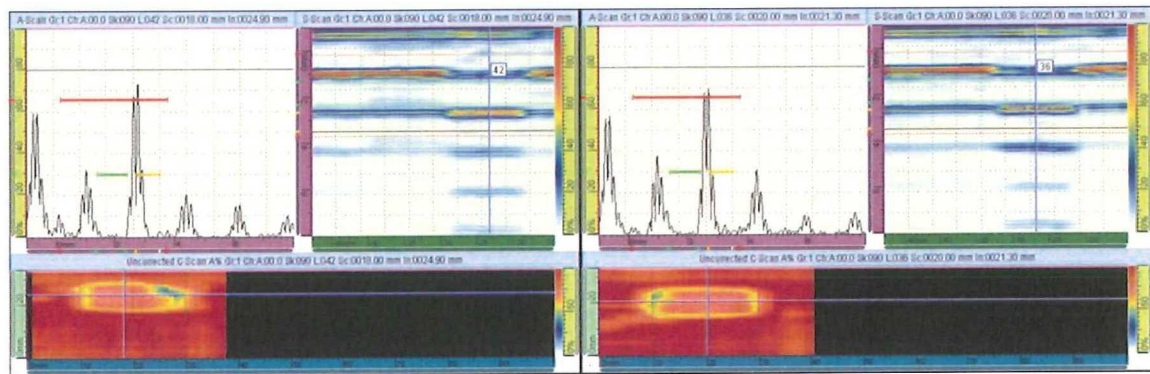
PA Scan of USW141001-03 which is welded with 720 [J].
